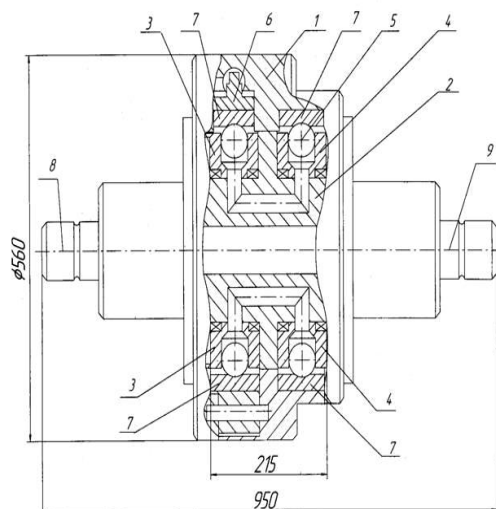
Volumetric hydraulic transmission type GOP-900 based on a hydraulic machine radial piston type with ball pistons designed by NIgidroprivod
